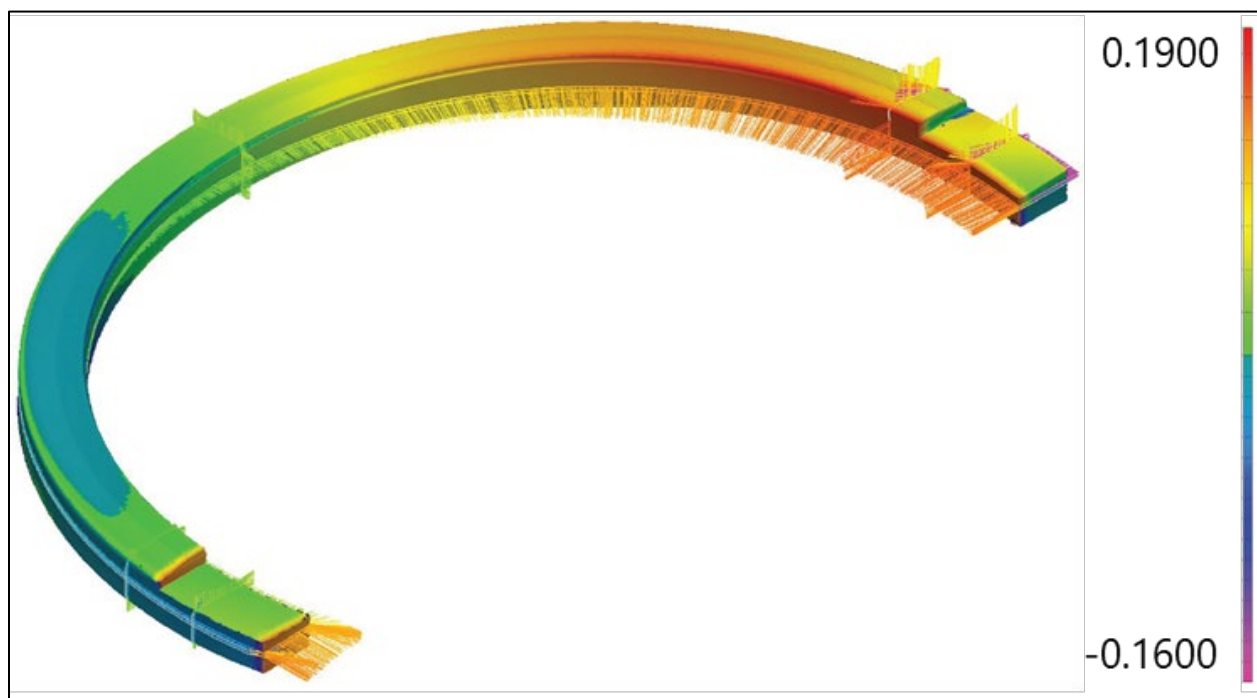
Example of one control view from the 3D scan report of ring half A2229 showing the OD being under dimension. The greatest value on the color scale (red) is +0.1900 inches. The lowest value (pink) is -0.1600 inches.
